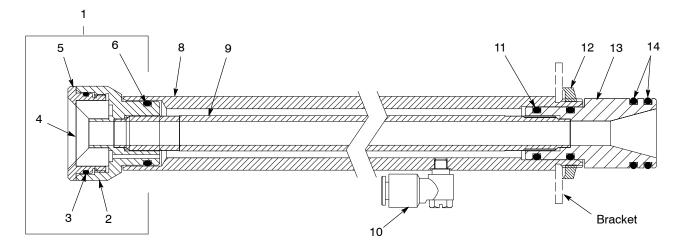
Threaded Fluidizing Pick-Up Tube Kit
